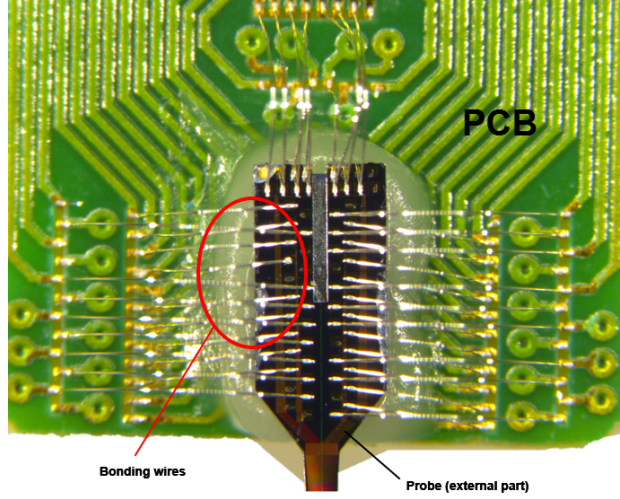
Zoom of the Probe glued and wirebonded to PCB.
